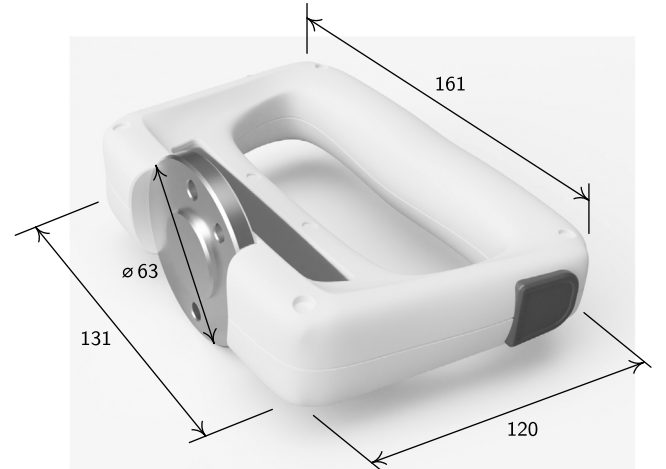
3D handle designed for the Franka Emika robot, dimensions in millimeters.
